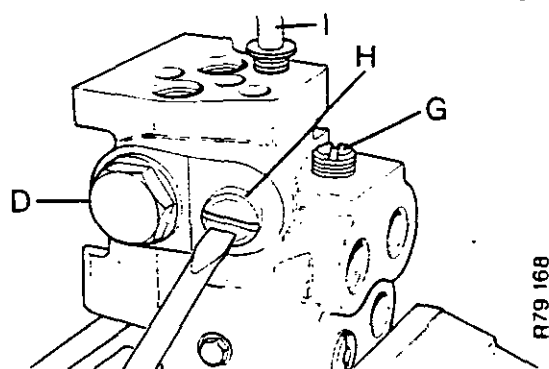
REMOVING THE RATE OF LOWERING AND NON-RETURN VALVE
